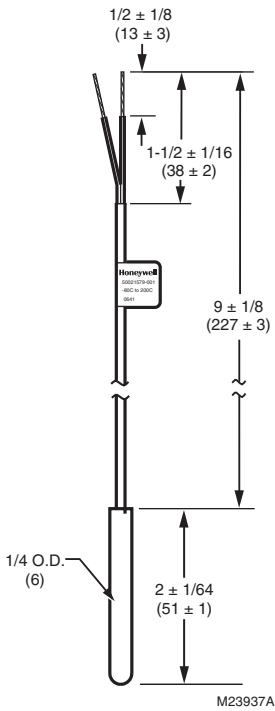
50021579-001 Dimensions in Inches (mm).
